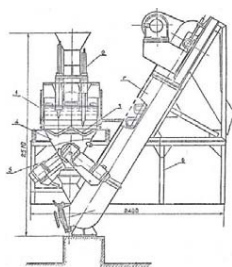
A crushing-grinding machine, with a vibrating drive unit
